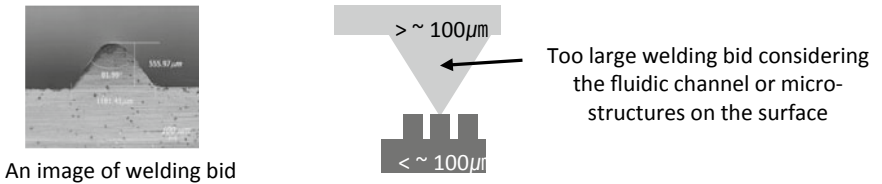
An image of welding bid and an issue in the size of the welding bid and channel
